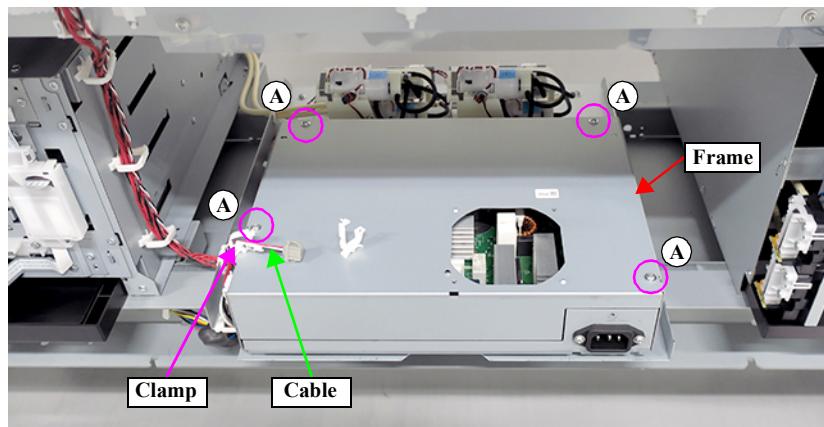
Removing the POWER SUPPLY UNIT (1)
